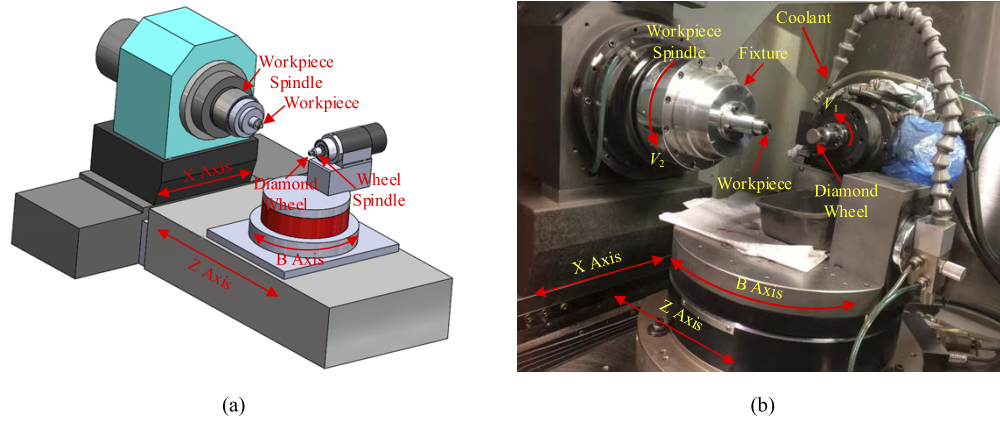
Schematic diagram of Moore Nanotech 450UPL grinding machine (a) the outline of the 4-axis grinding machine tool, (b) overview of the experimental setup
